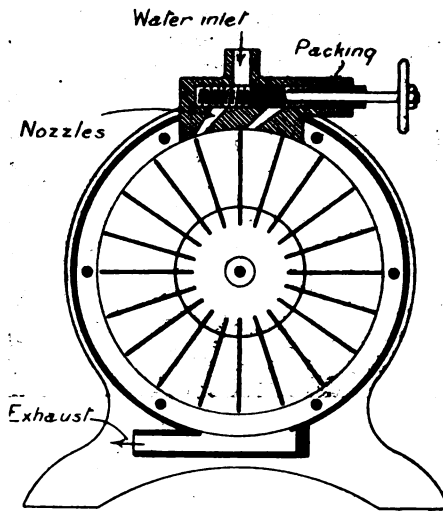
SECTION THROUGH MODEL WATER TURBINE.
